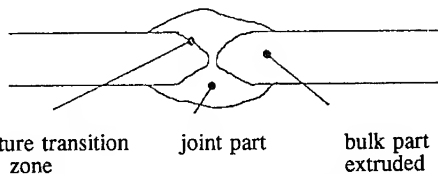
Schematic of the welded eutectoid Zn-Al alloy
